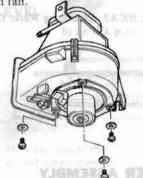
Removing Blower Motor 5. Installation is in the reverse order of removal.
